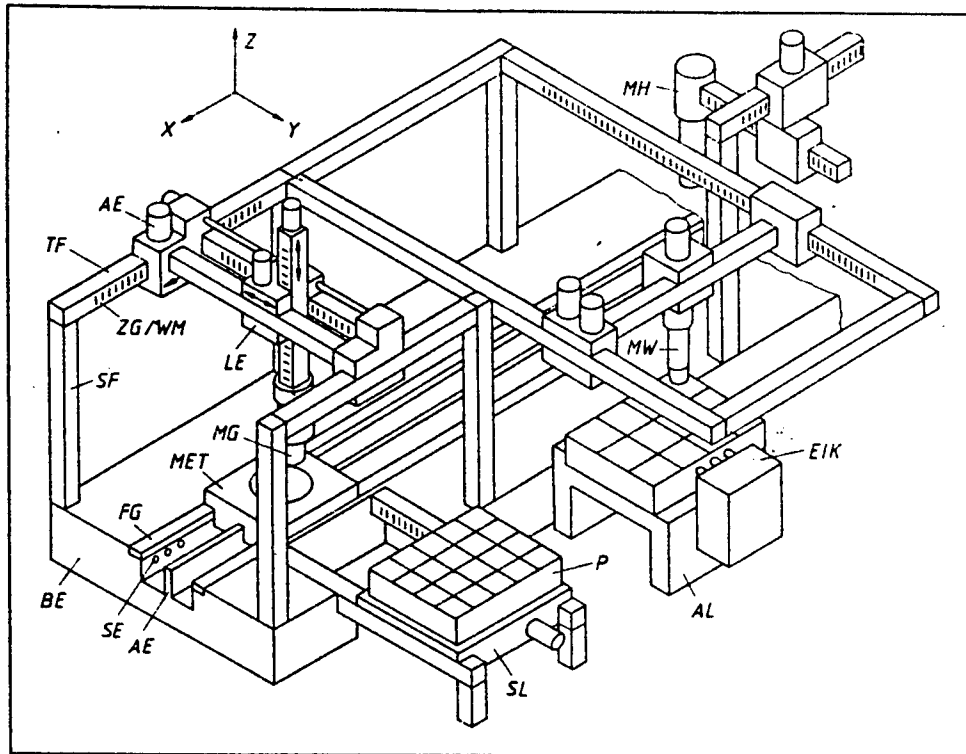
Mechanical-engineering components of a modular assembly system. BE basic element; FG guides for MET the assembly unit—supports of the interior transport system; SE control elements; SF support elements and TF bearer elements of the LE linear units with CG rack and pinion or drawing drive and WM distance measuring system. MG assembly gripper; MW assembly tool; MH assembly hand (previously the assembly heads); P palettes, some in the AL storage facility with the EIK energy-information coupling system that can be reached by the active assembly tool or storage elements by way of SL sleds.
